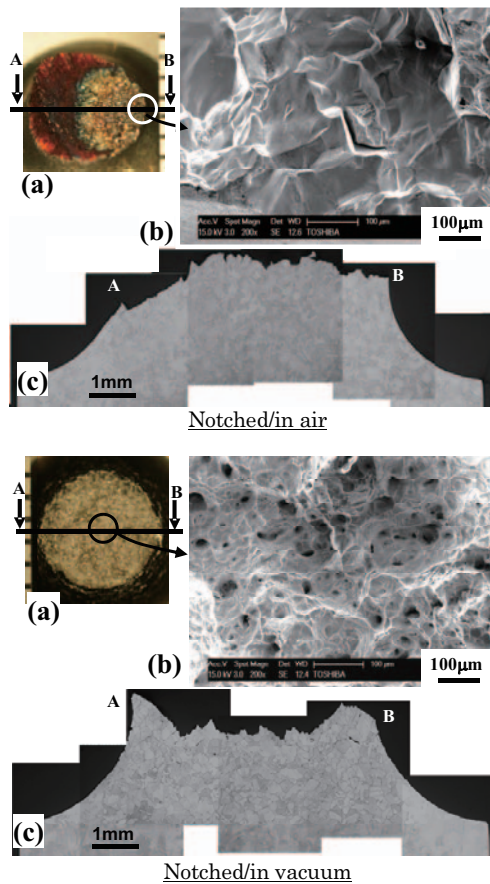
The fracture appearance of the notched specimen fatigue-tested in air and vacuum at 600°C /0-750 MPa/10min. (a)Viewpoints of fracture surfaces, (b)Crack initiation sites (by SEM), (c)Cross-sectional microstructures (A-B section)
